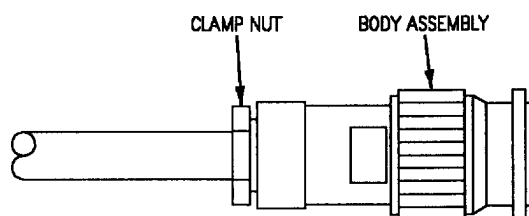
31-8473-5 (MIL-C-39012) Coax Connector Repair (Sheet 2)
